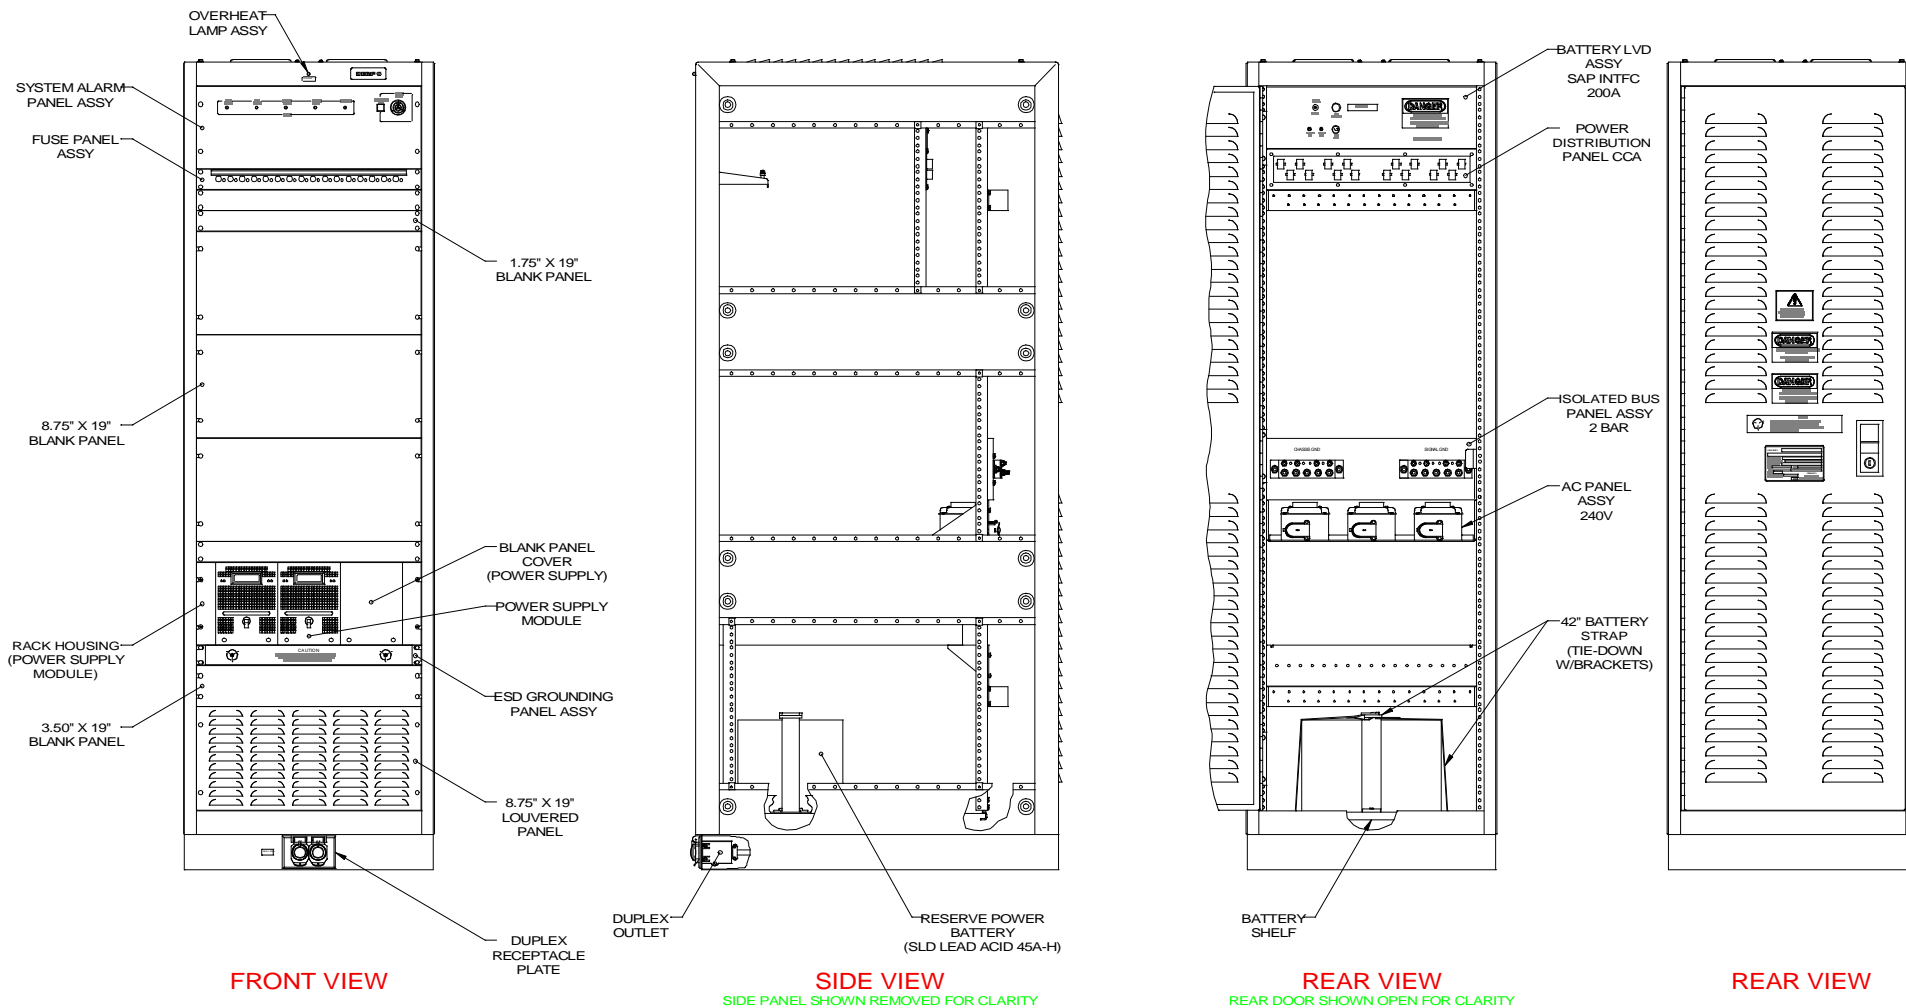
Rack Assembly, ETVS, Remote Power, 4-Position
